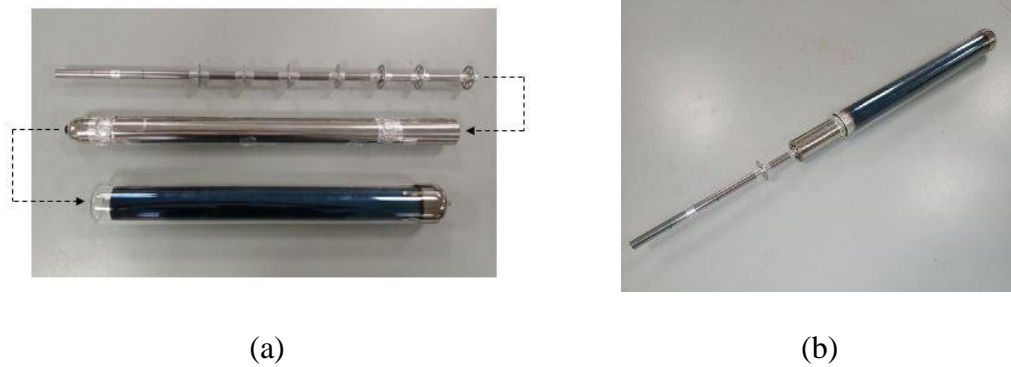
(a) Design arrangement of EGATC (b) EGATC assembled components
